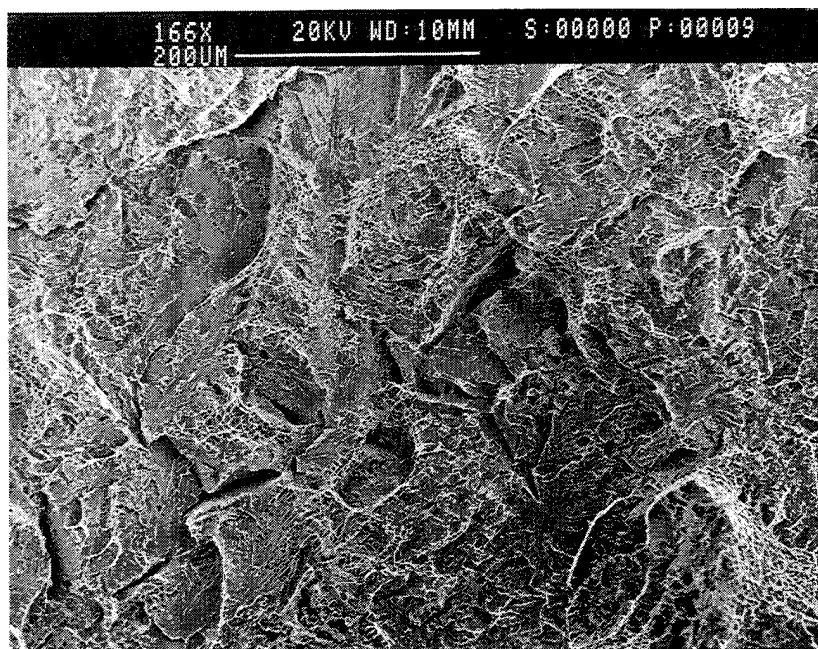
MV 1 - GMA Weld Using C5 Cover Gas Showing Intergranular Cracking and Uneven Cleavage
